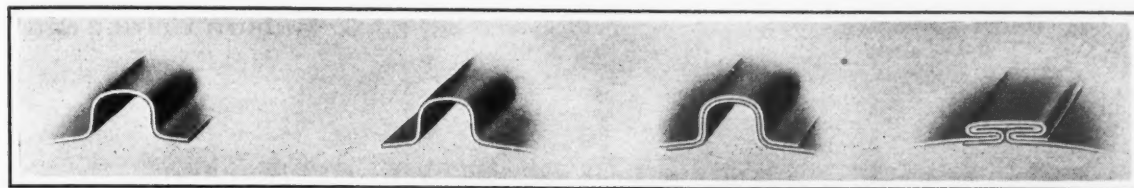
Successive Steps in Forming the Compound Side Seam of Drum Bodies
